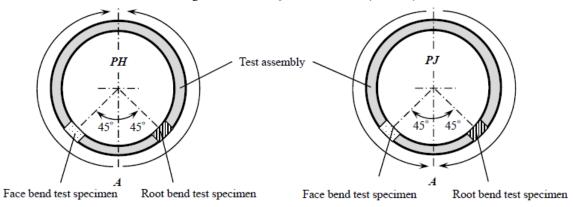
Selection of Test Specimen for Tube Test Assemblies Applied with Tube Positions for Welding Upwards or That for Welding downwards in Qualification Tests (Renewal)
